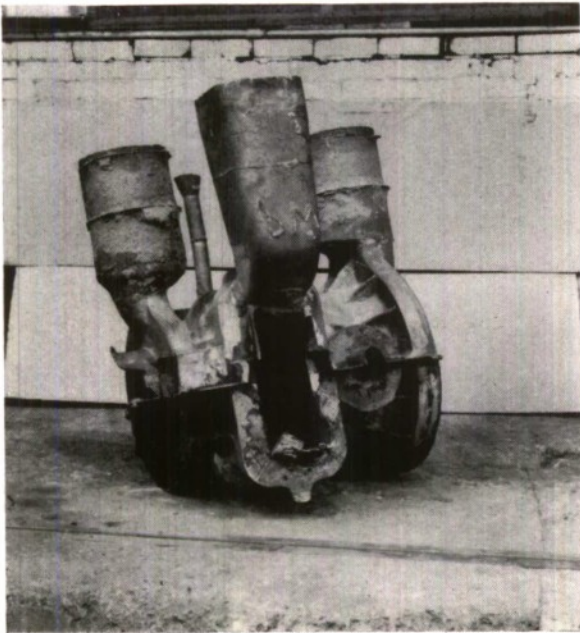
The second cupro-nickel casting shown in the drawing B on the left.
